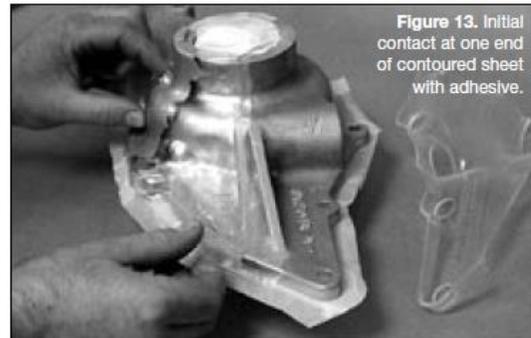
Initial contact at one end of contoured sheet with adhesive.
